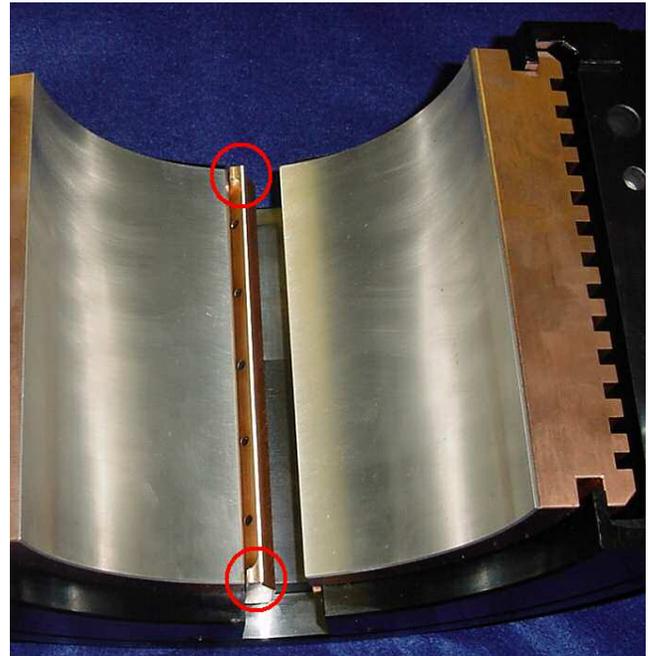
Spray-bar blocker Side Shields Protecting the Inlet Oil.
